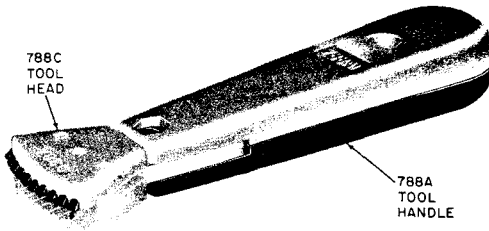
5-Pair Cutoff Tool Head (788C Tool)
